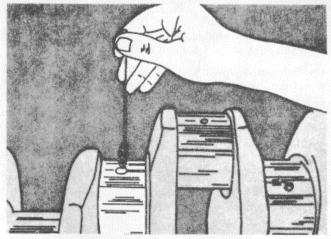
C-13. Clean the Oil Drillings in the Crankshaft
